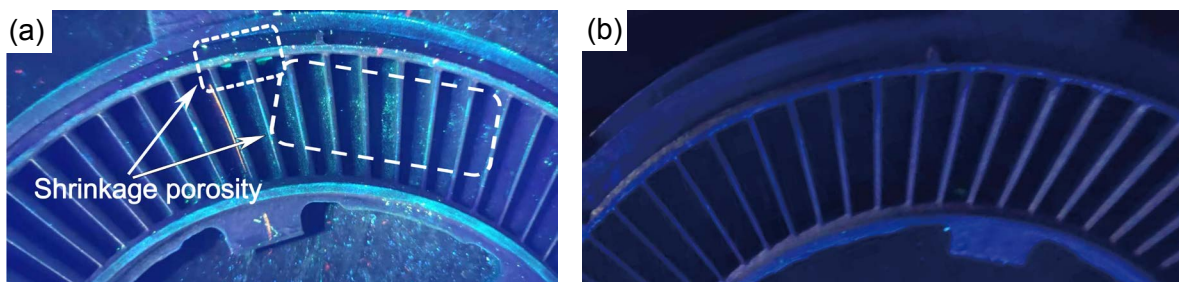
Shrinkage and porosity defects detected by fluorescent penetrant inspection on castings of different schemes: (a) Scheme 1; (b) Scheme 3
